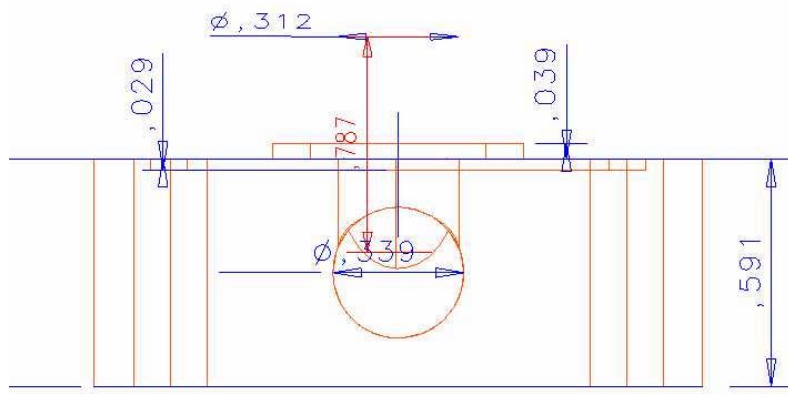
Outlet Valve Cover (Dimensions in inches)
